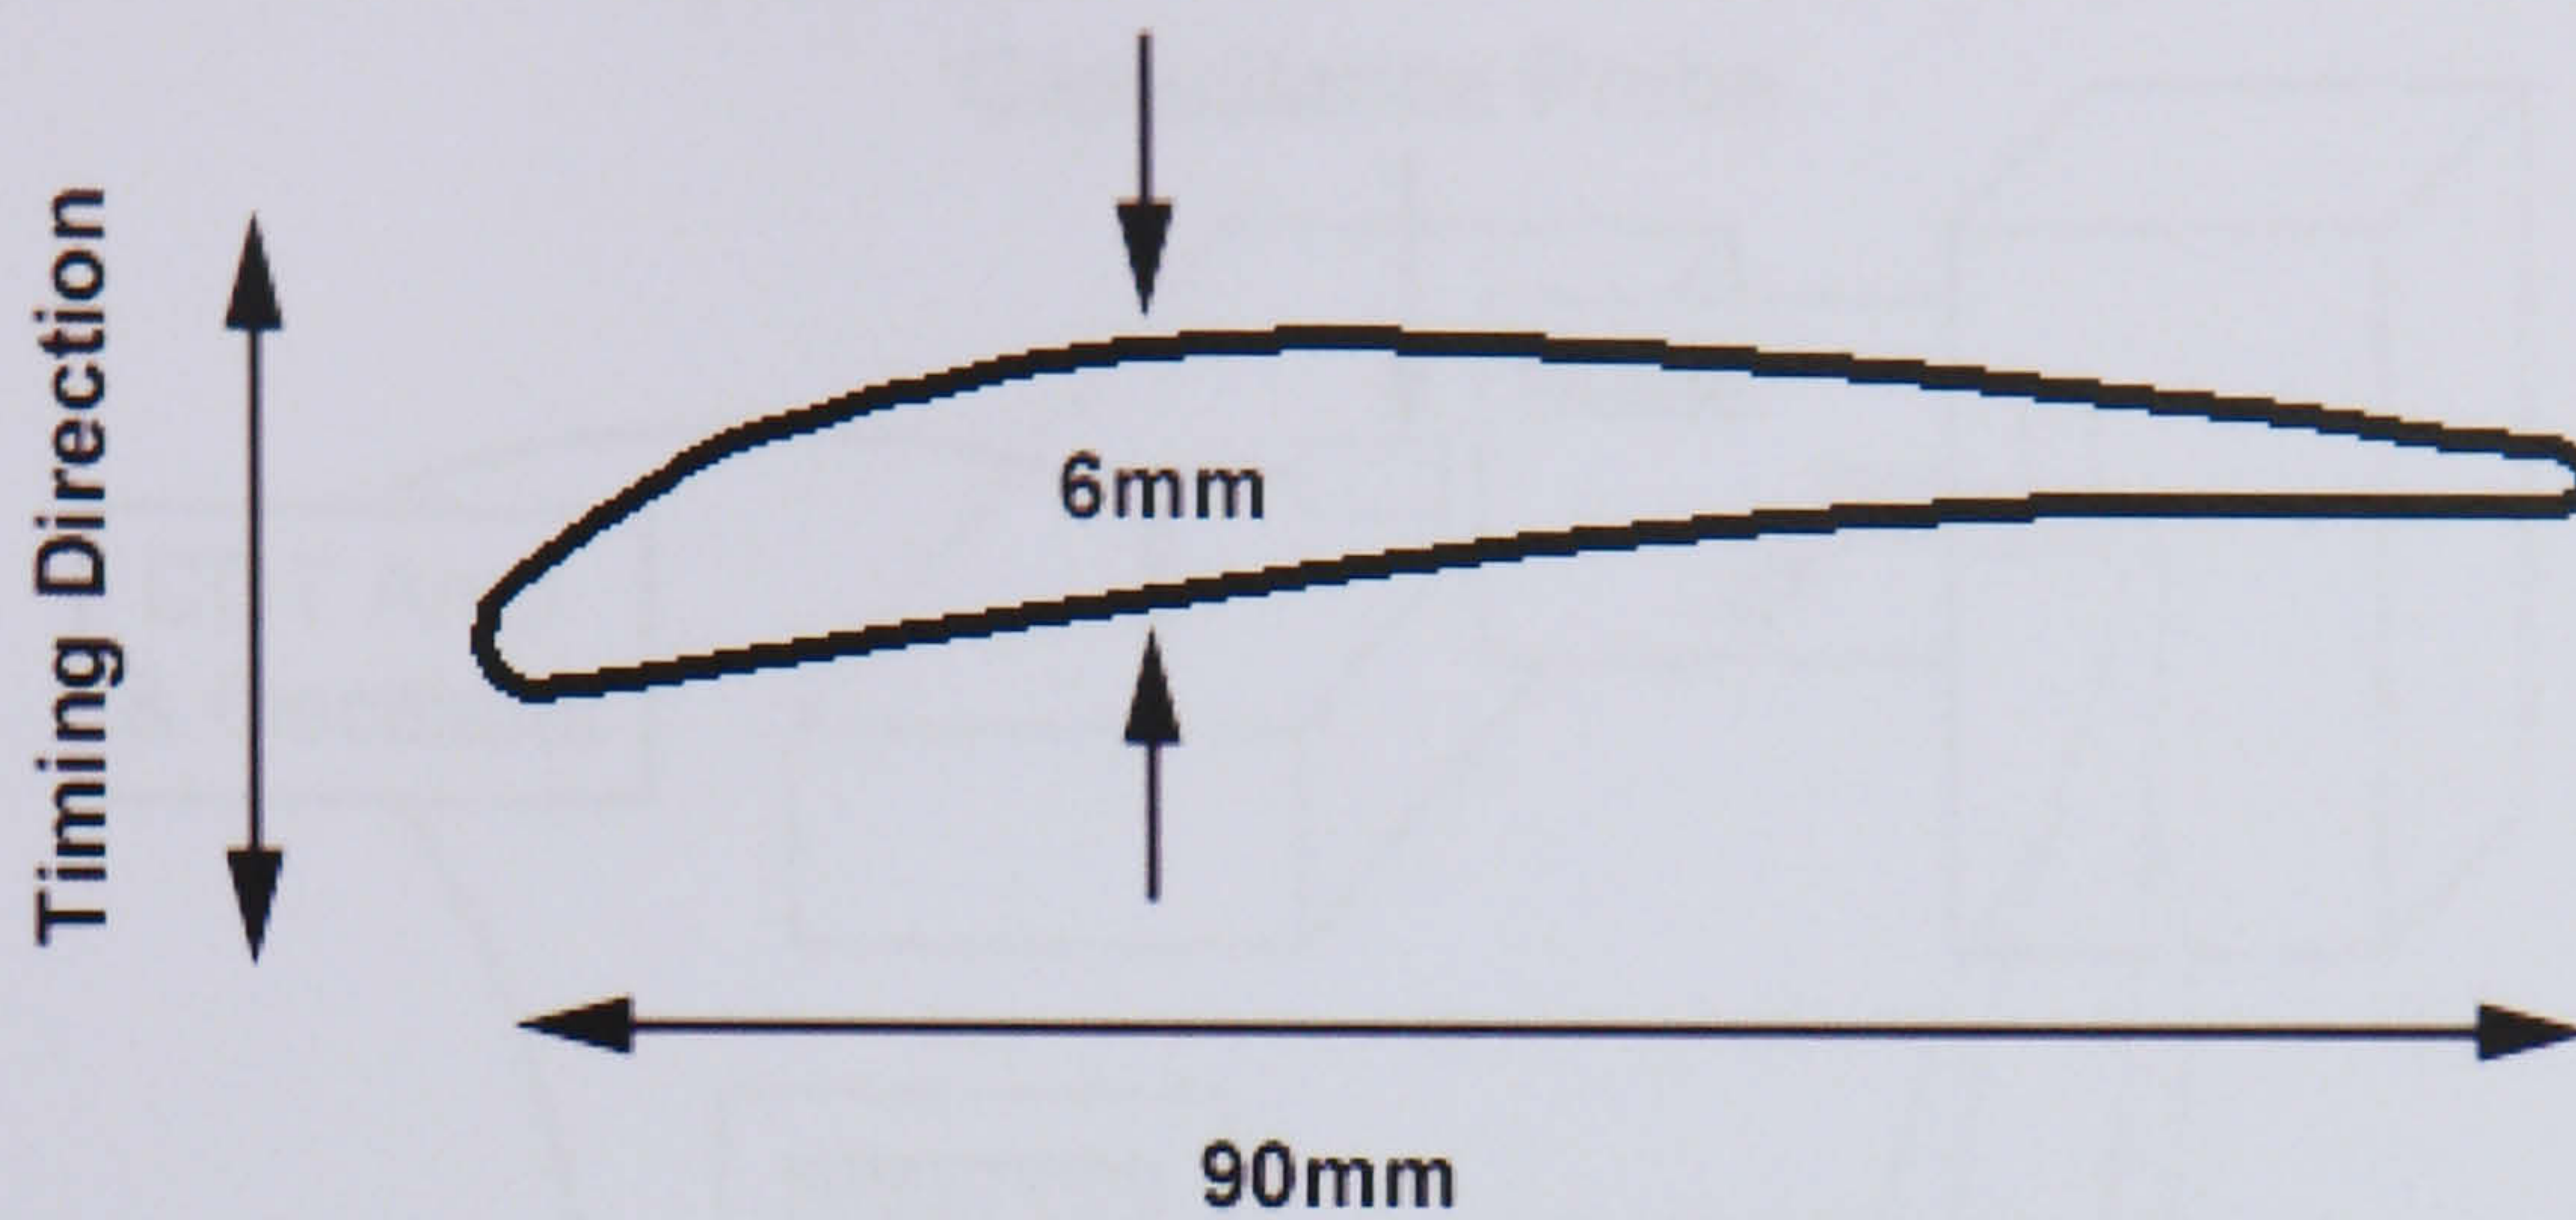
Compressor Rotor Blade Tip Geometry
